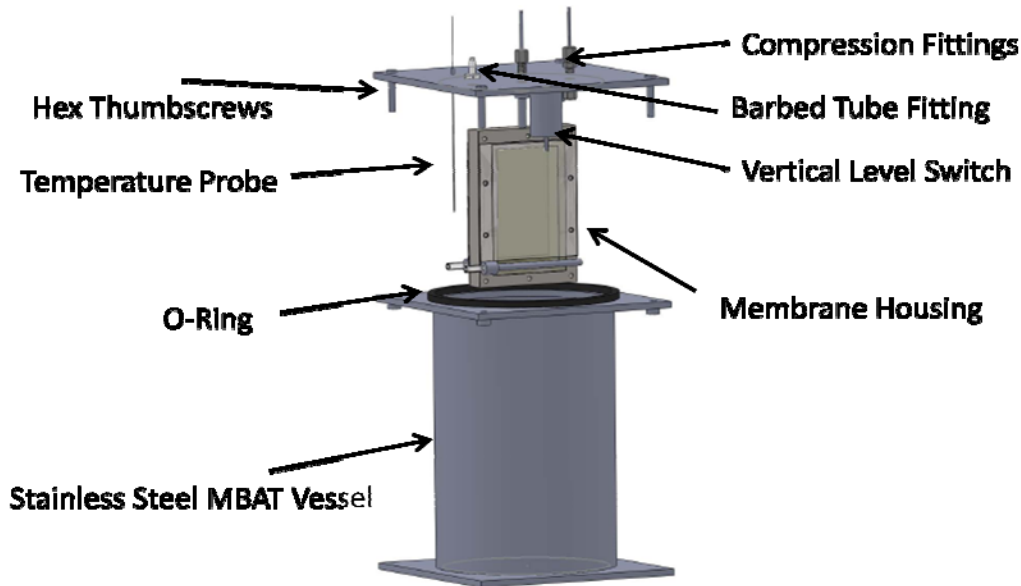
Final design can be seen here with the cylindrical vessel along with the square shaped head plate, ring, and base plate.
